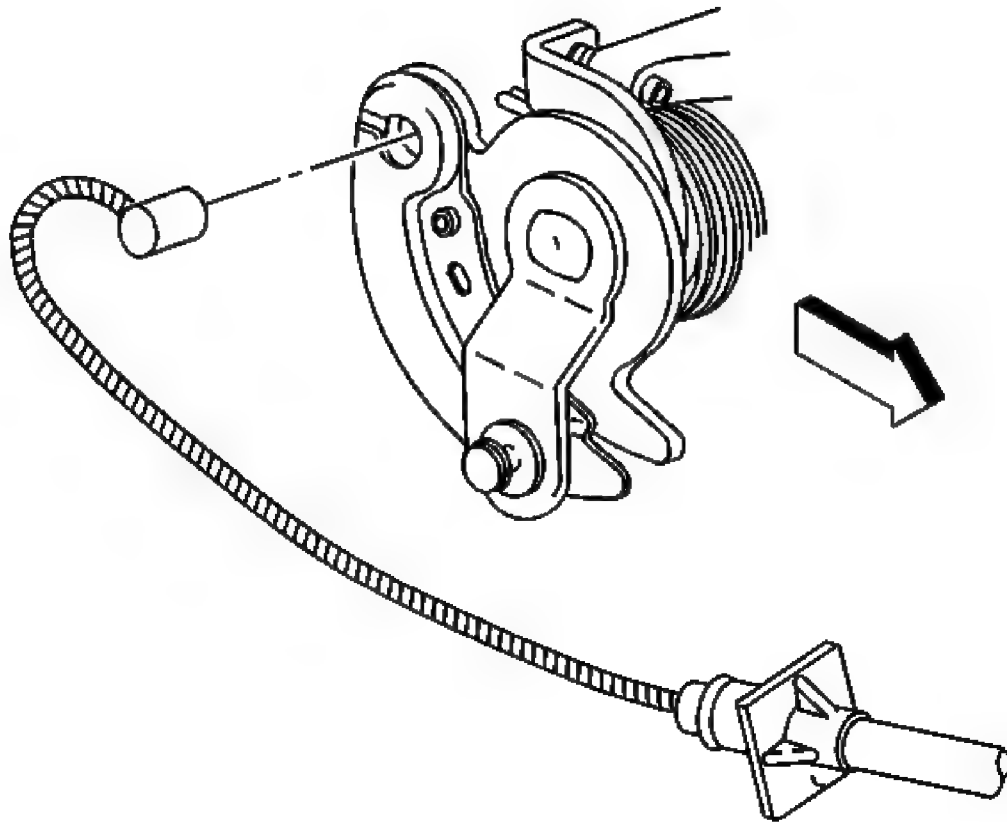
Identifying Accelerator Cable/Throttle Body Lever
